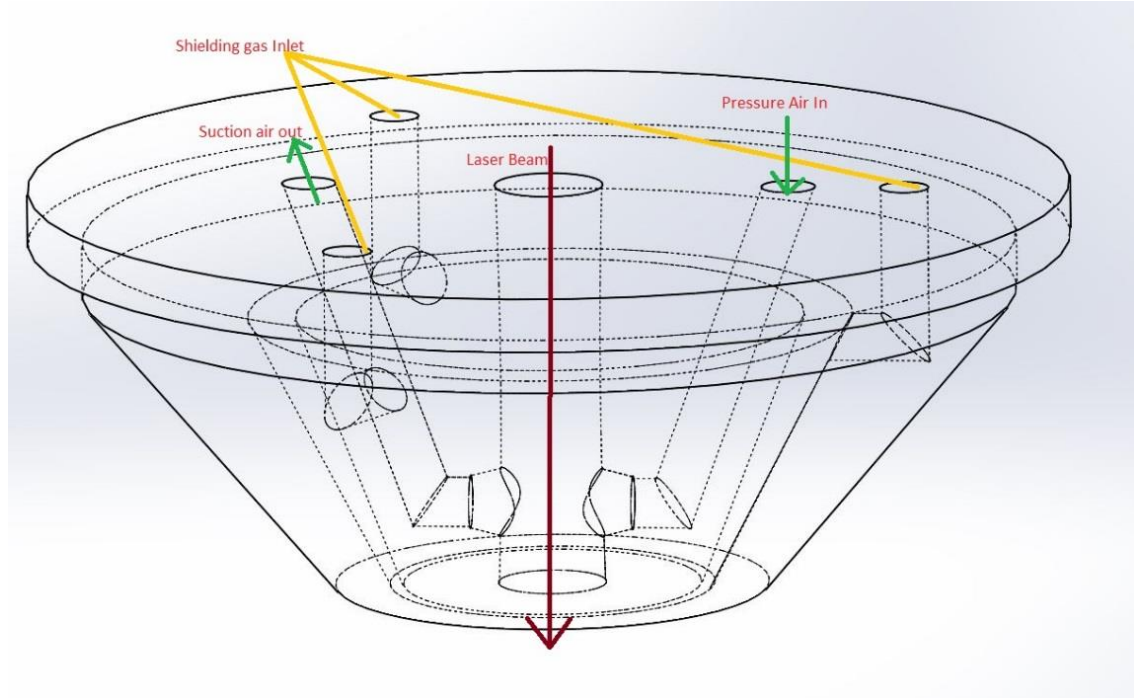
Wire frame illustration of inner geometrical shape of nozzle.
